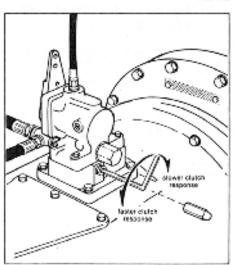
Clutch Cylinder Timing Adjustment; used to regulate shifting time.
